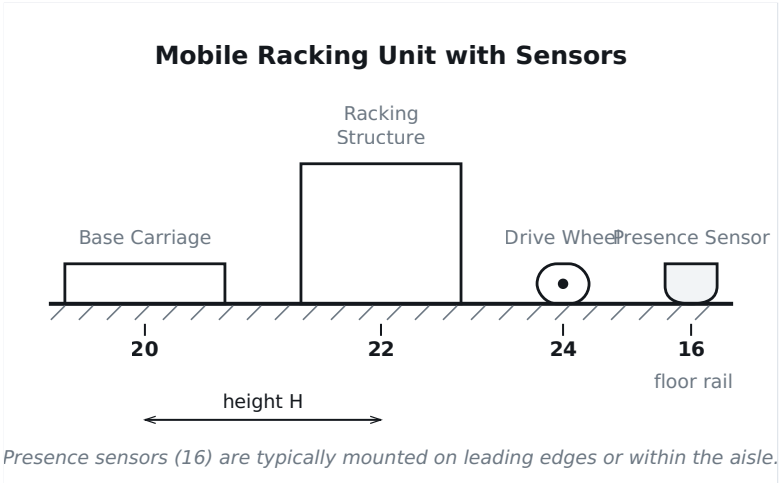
An elevation view of a mobile racking unit showing typical sensor mounting locations. PNG
